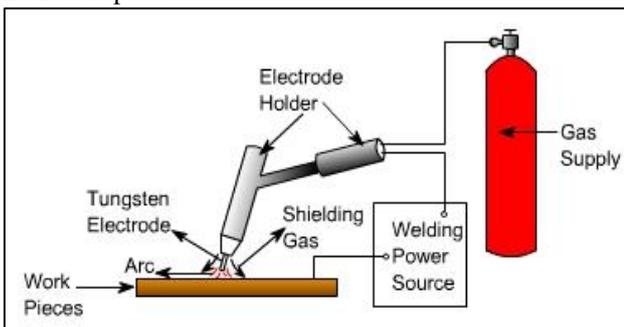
[Schematic Diagram of TIG Welding System]
